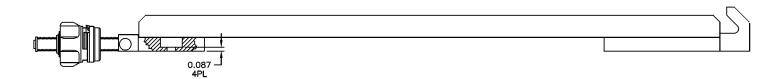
RT-5000 Tray Horizontal Mount (Sheet 1 of 1) Dwg No. 154-016835, Rev A
